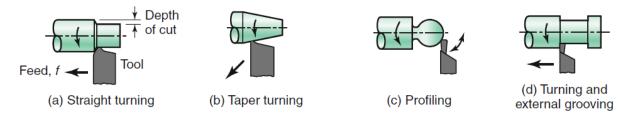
Basis turning operation performed on a lathe (Youssef and El-Hofy, 2008)
